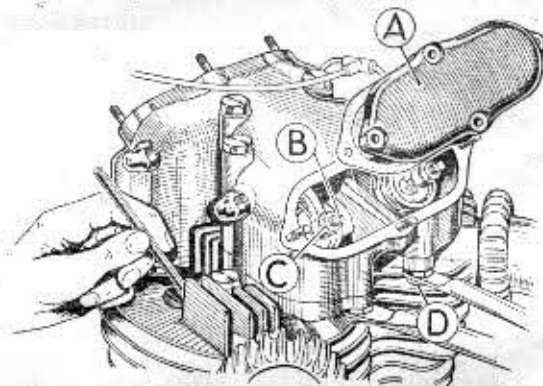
TAPPET ADJUSTMENT AND IGNITION SETTING
